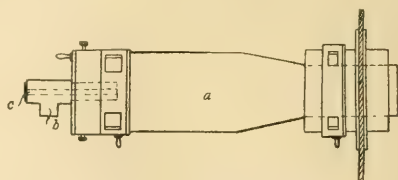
ALTENHEIM BURNER FOR LANCASHIRE BOILER.
